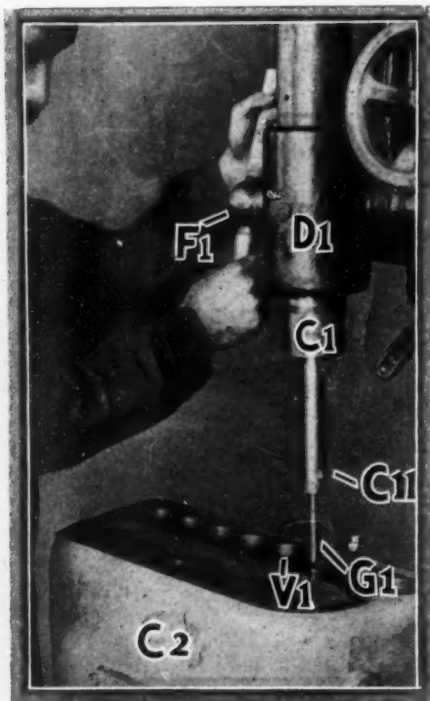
Depicting the use of a drill press in conjunction with a cutter bar in the dressing of the metal above the valve seat in a motor cylinder
